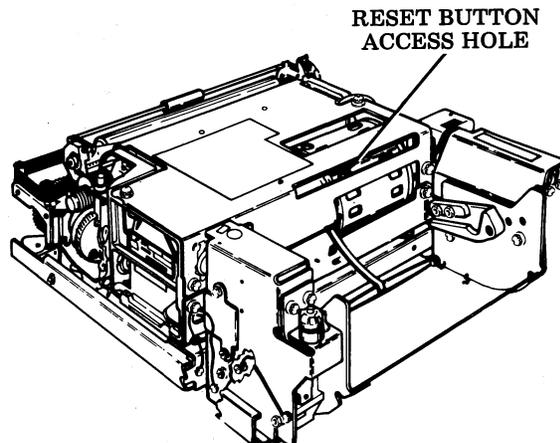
Reset Button Access Hole (Friction Feed Printer)
